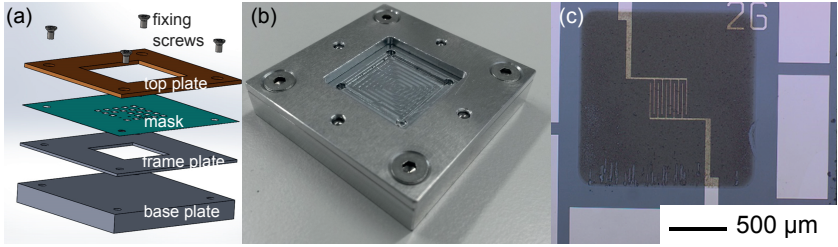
(a) Schematic shadow mask assembly. (b) Photo of shadow mask assembly without Si reticle and shadow mask. (c) Optical micrograph of Picodeon PLD WO_3 layer deposited on a silicon chip. After Ref. [242].
